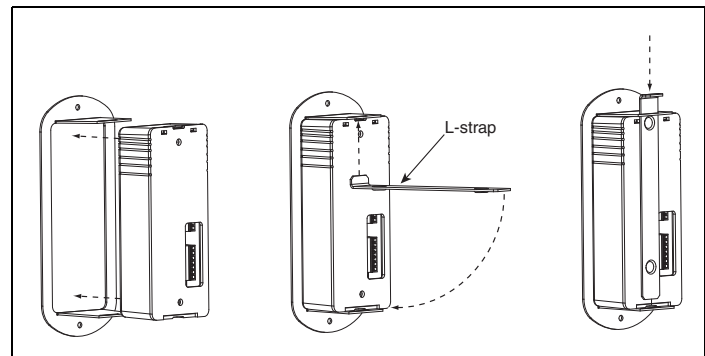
Attaching the Fume Hood Monitor to the recess mounting bracket.
